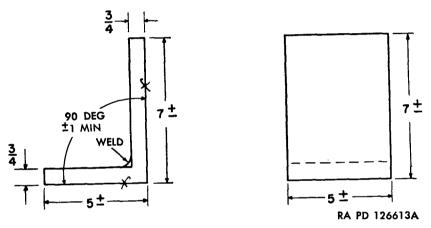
Dimensional detail drawing of universal 90° angle plate.
